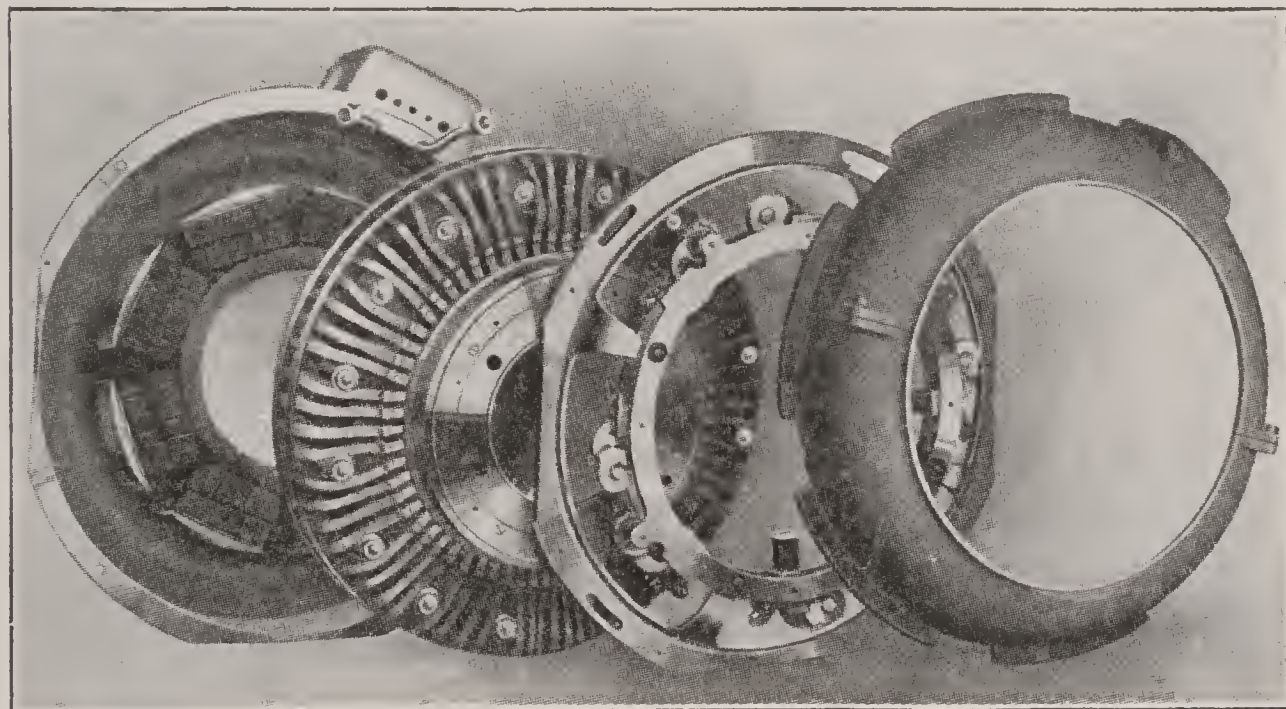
Details of U.S.L. Flywheel Type Dynamotor with Outside Armature
